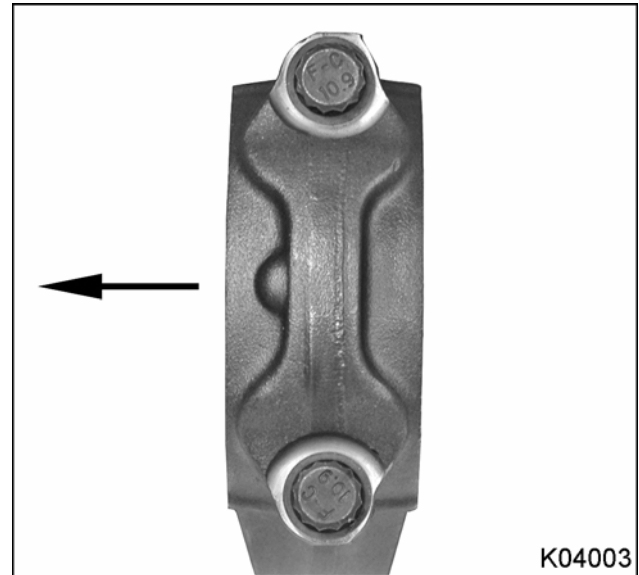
Connecting rod cap with M11 connecting rod cap bolts (protrusion points to front of engine)
